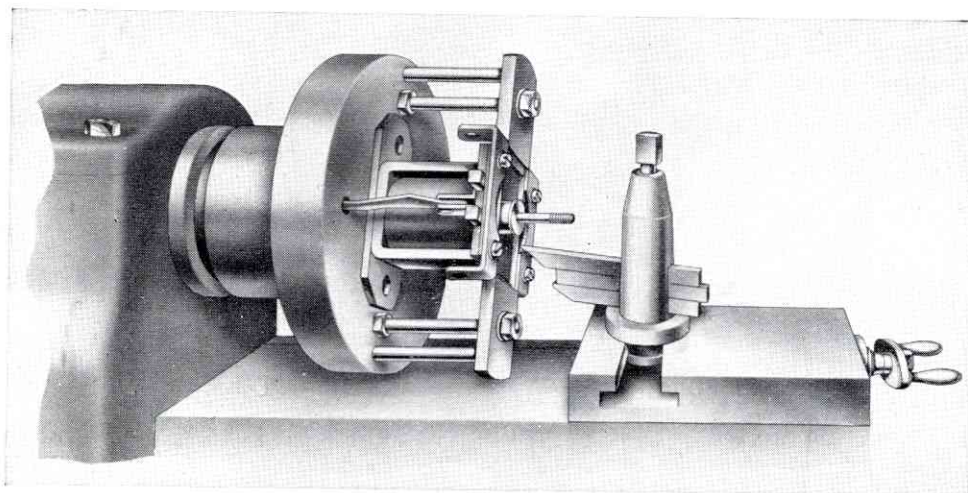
SIMPLE FIXTURE FOR HOLDING SWITCH IN LATHE
